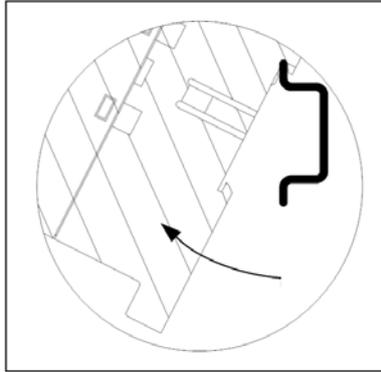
Disassembly diagram of the DIN guide rail
